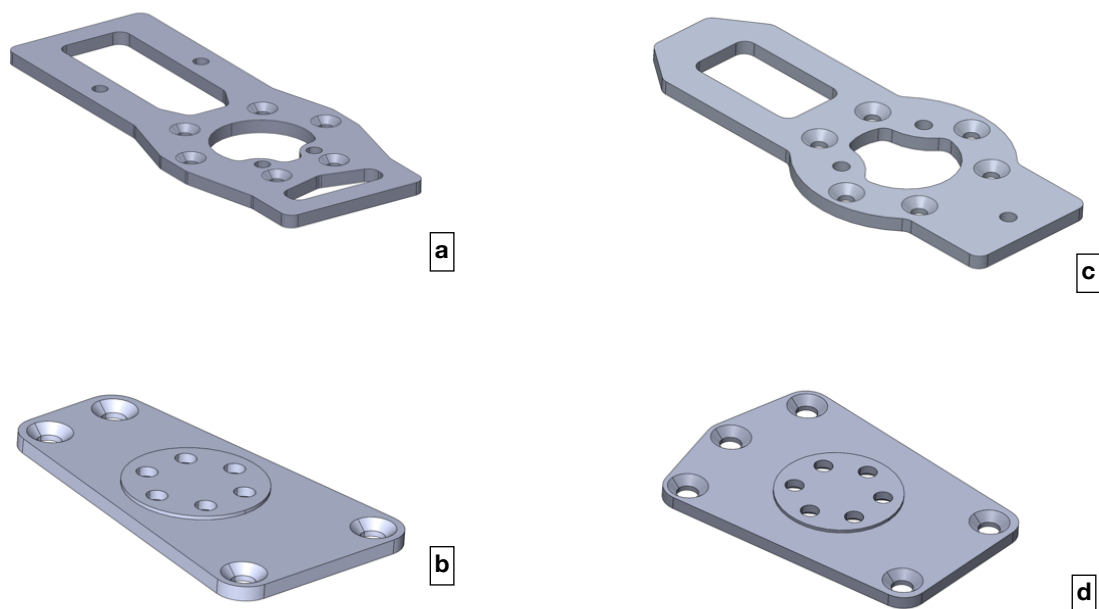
Rear top (a) and bottom (b) plates and front top (c) and bottom (d) plates
